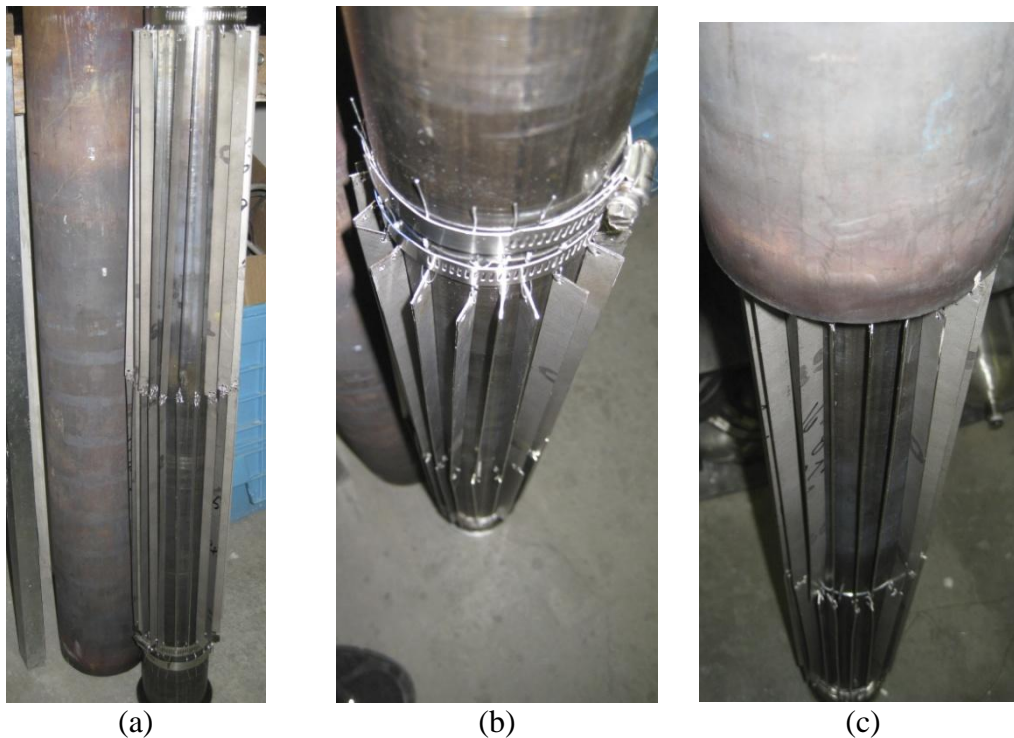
(a) Reactor inner tube with inserts installed, (b) hose clamps used to secure inserts and thermocouples to inner tube, (c) installation of inner tube/inserts into outer tube.
